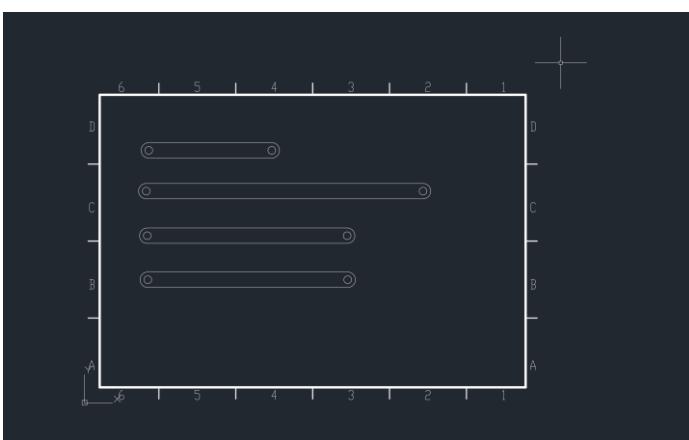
drawing sheet in Autocad version showing the size of the bar components. The sheet is in IOS 297mmx210mm.
